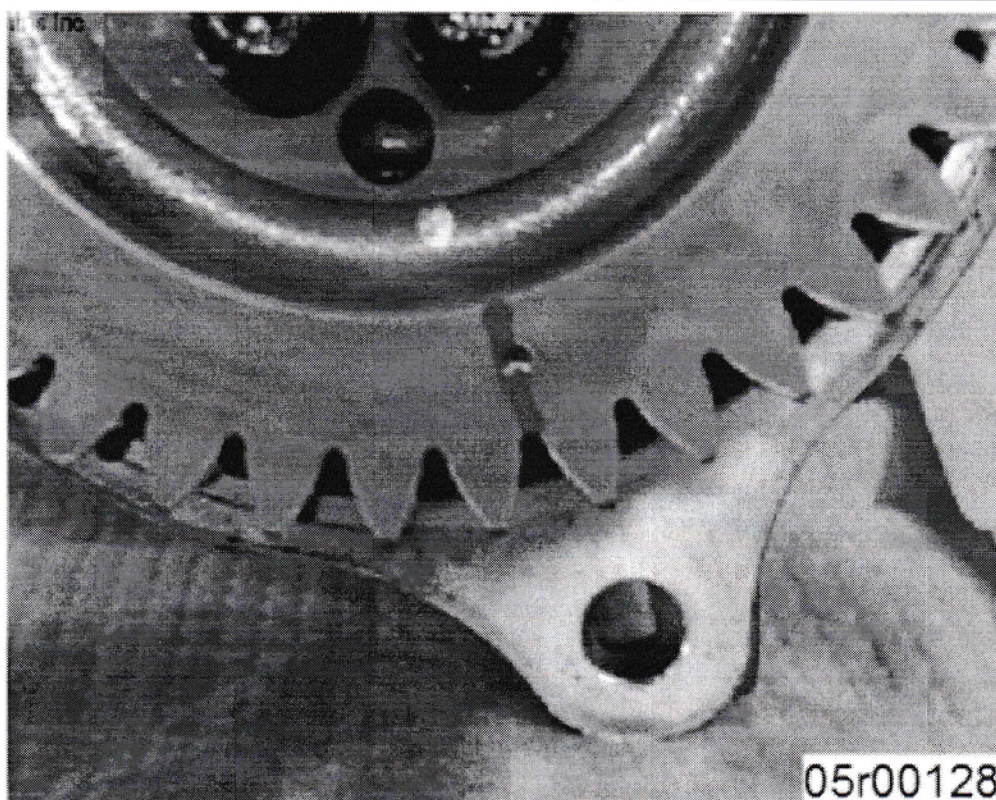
, Line over Fuel Pump Gear Timing Mark to Outer Edge of Fuel Pump Gear.
